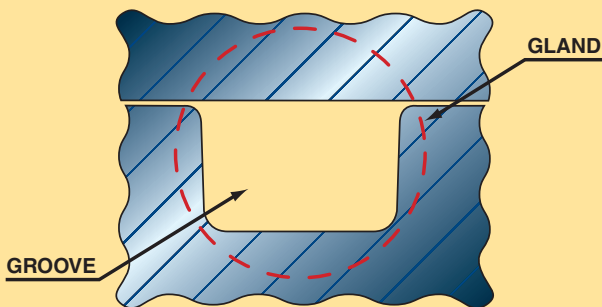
A "groove" is a machined recess within the "gland" cavity.
